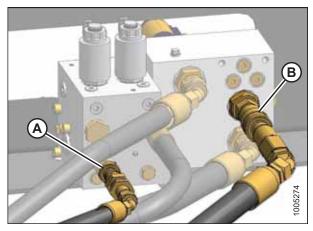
M150/M155/M155*E4* without Reverser Valve
